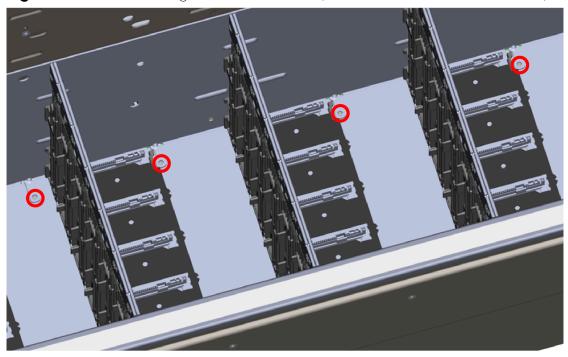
Left Drive Cage Screw Location (Connection to the base board)
